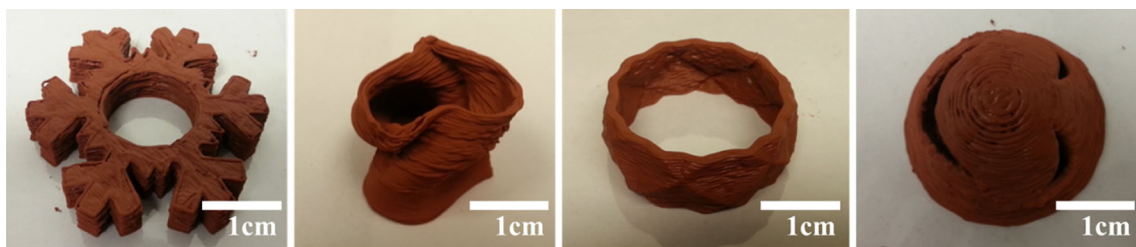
3D structures printed by use of Cu paste (106 μm , 65 wt.%) and screw extruder 3D printer.
